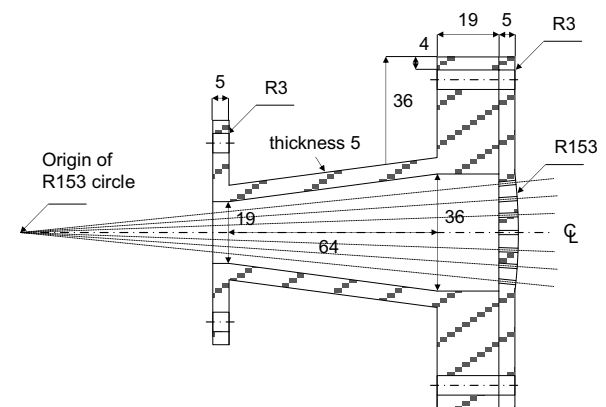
Nozzle dimensions (in mm) adopted for 3D printing. All other dimensions as per NZS 4298 [6], Clause K.
